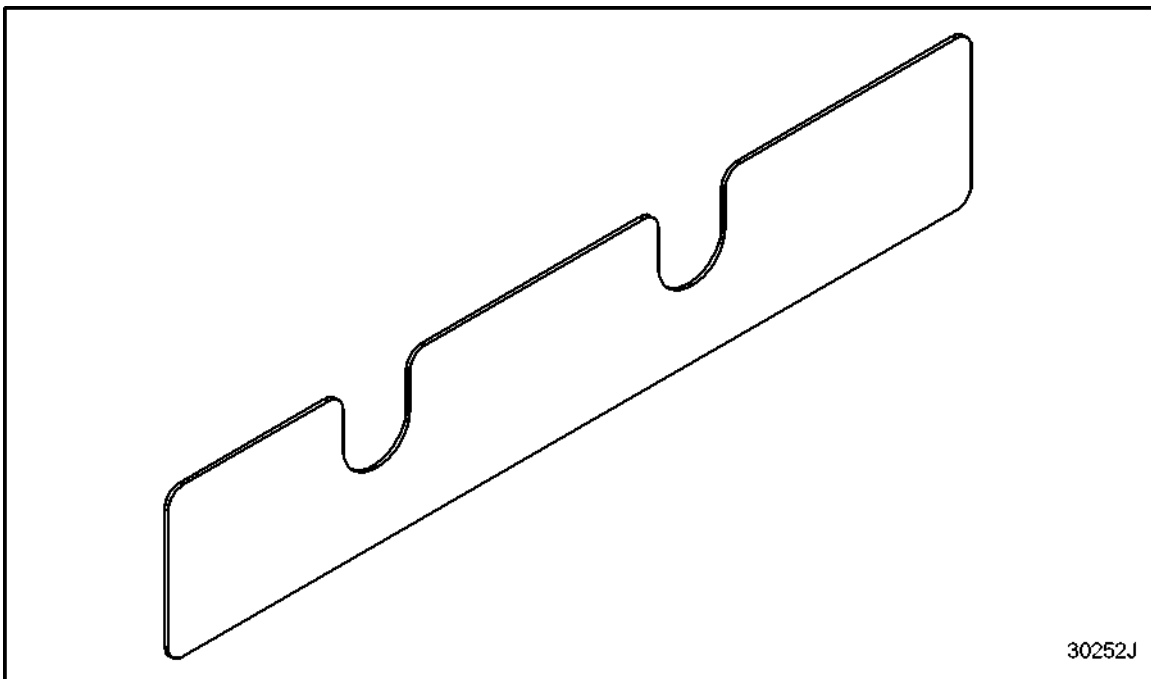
Cylinder Head Magnet Intake Shield,J 43099
